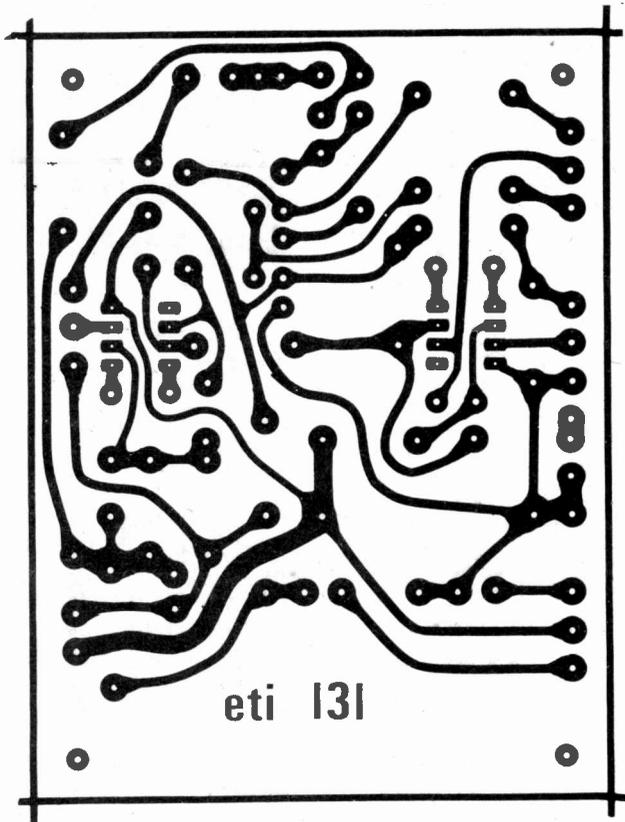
Printed-circuit board layout for the power supply. Full size 100 x 75 mm.
